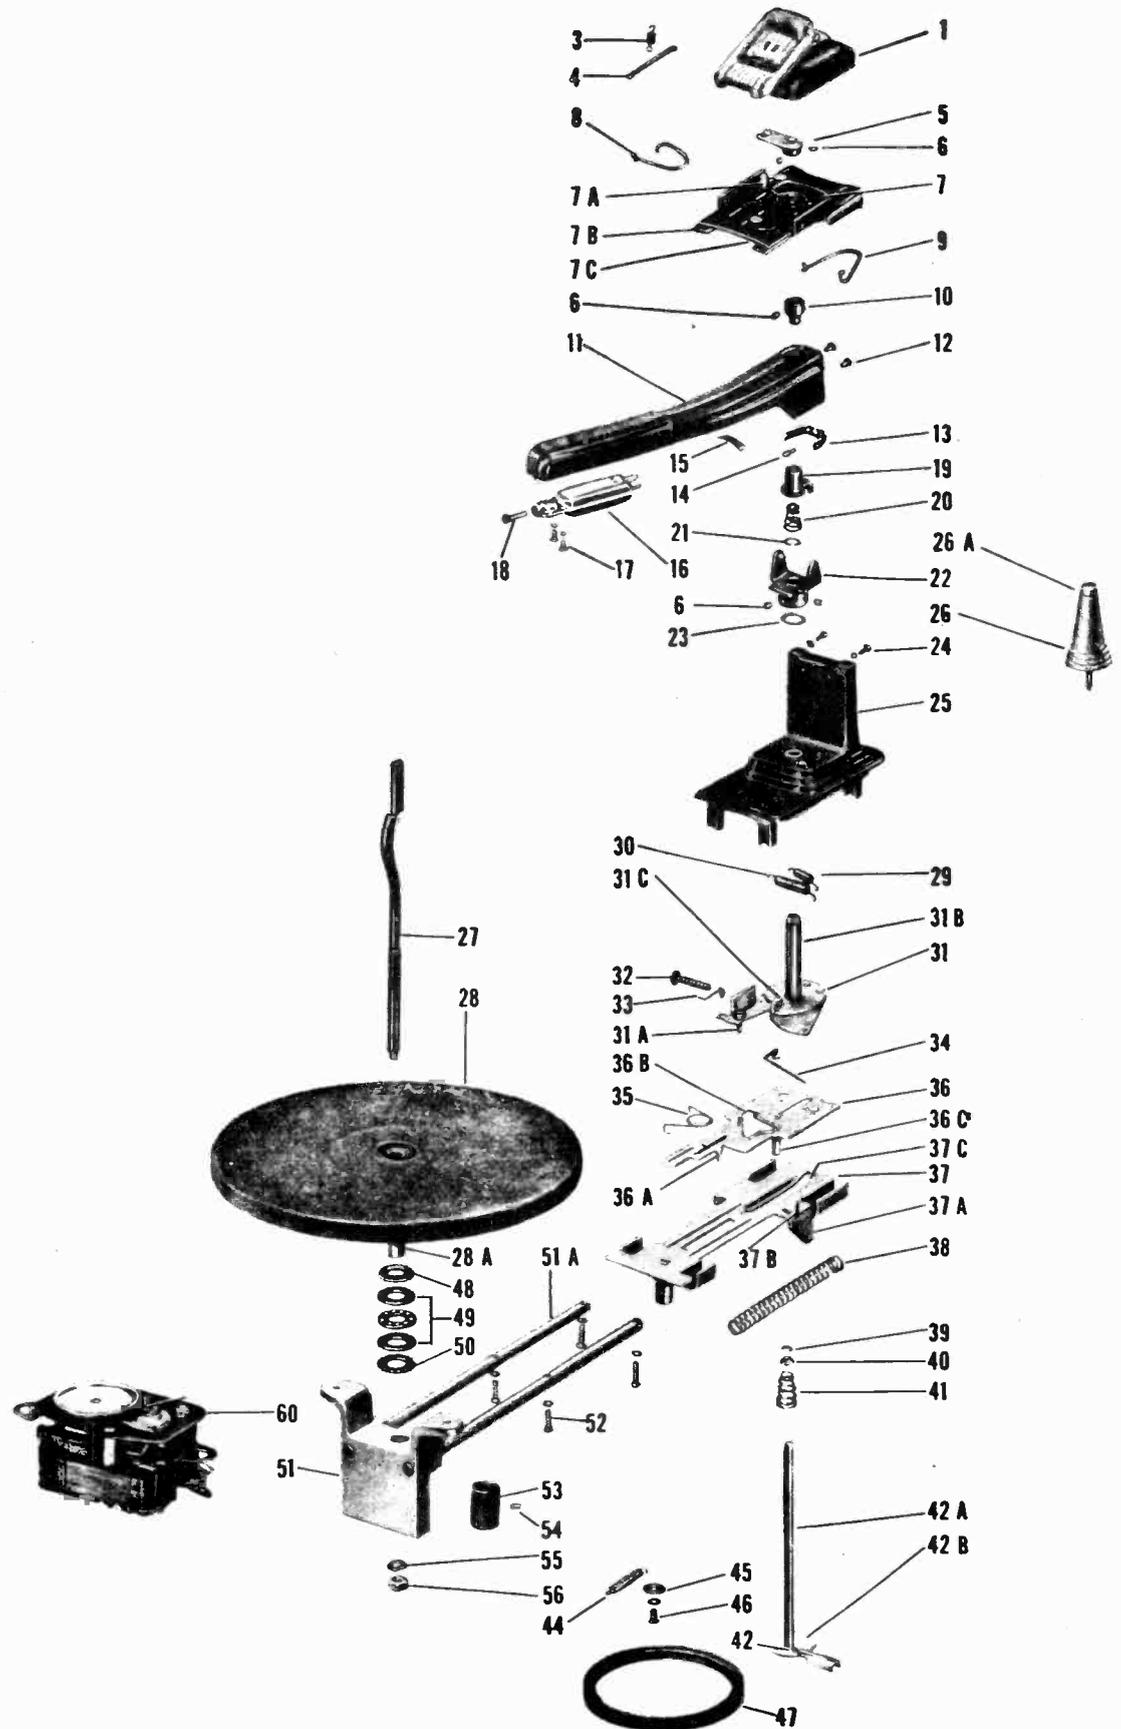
RECORD CHANGER, EXPLODED VIEW
